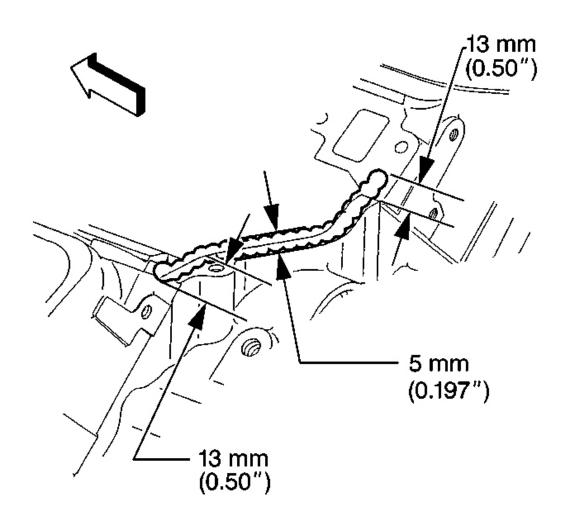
Applying Adhesive To Rear Top Of Engine Block Courtesy of GENERAL MOTORS CORP.
